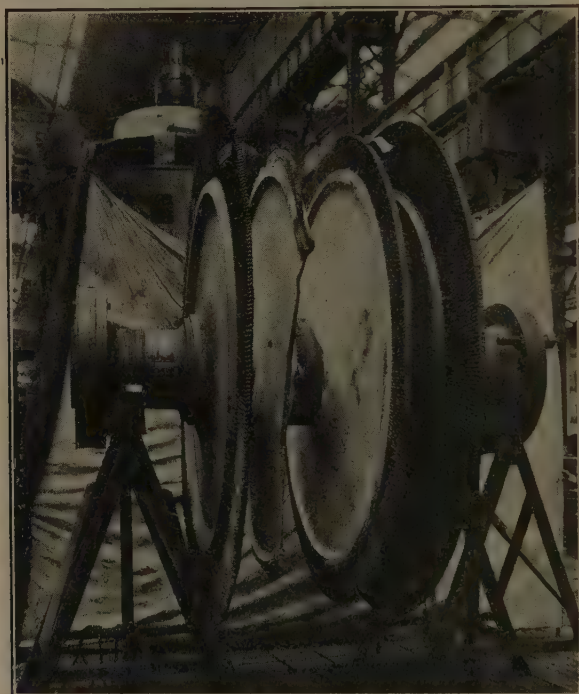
FATIGUE FAILURE WHICH DID NOT PASS THROUGH HOLES.
